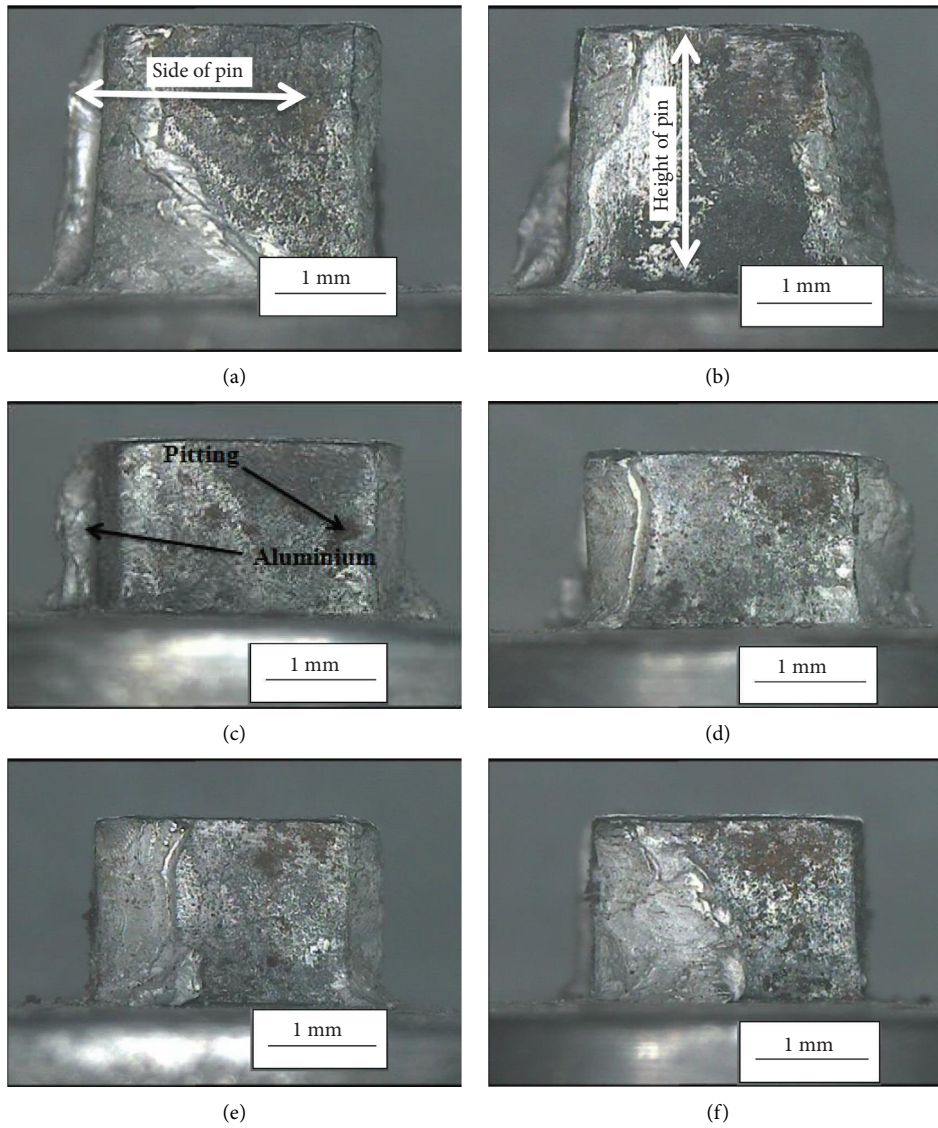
Condition of the tool after welding (a-c) TiN coated Tool, (d-f) DLC coated tool.
